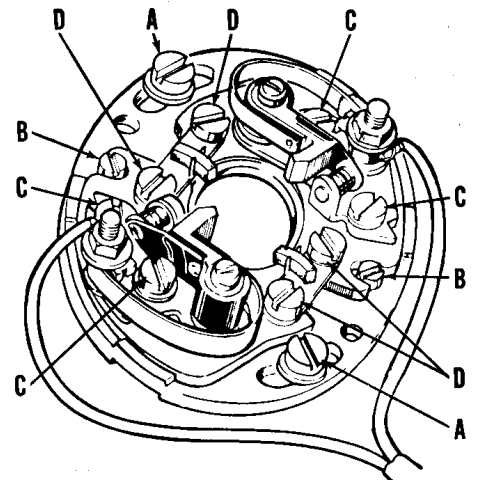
View of later type ignition breaker point assembly. Earlier models are similar. Loosen screws (C) to adjust breaker point gap.
